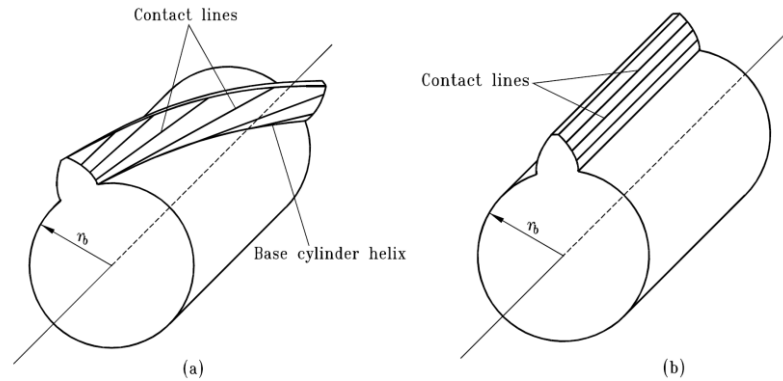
Progress of contact lines for a) helical gears and b) spur gears. [17] p.388
